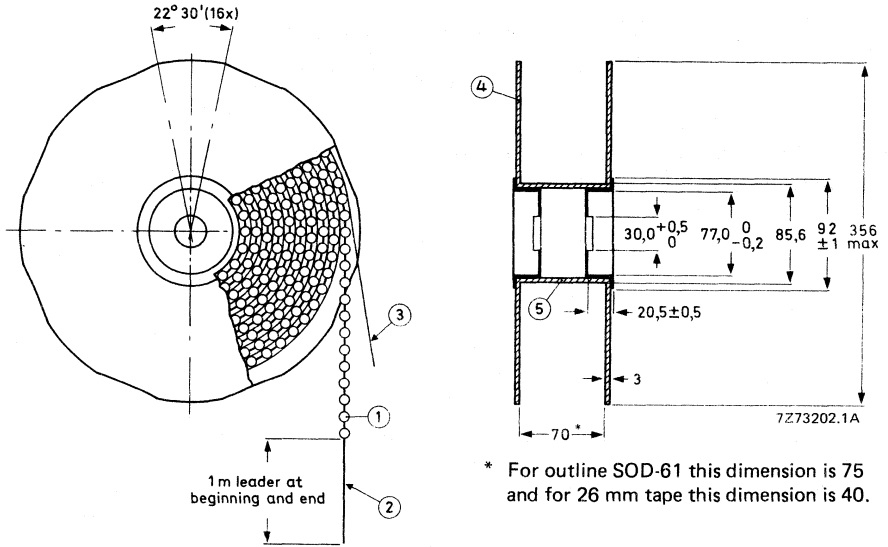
Reel dimensions (mm) for axial-leaded components.
